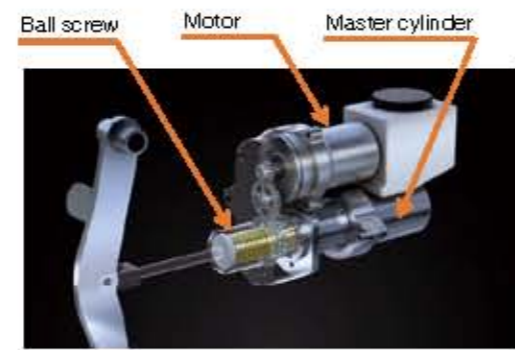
Structure of the ball-screw-type electric hydraulic brake booster
